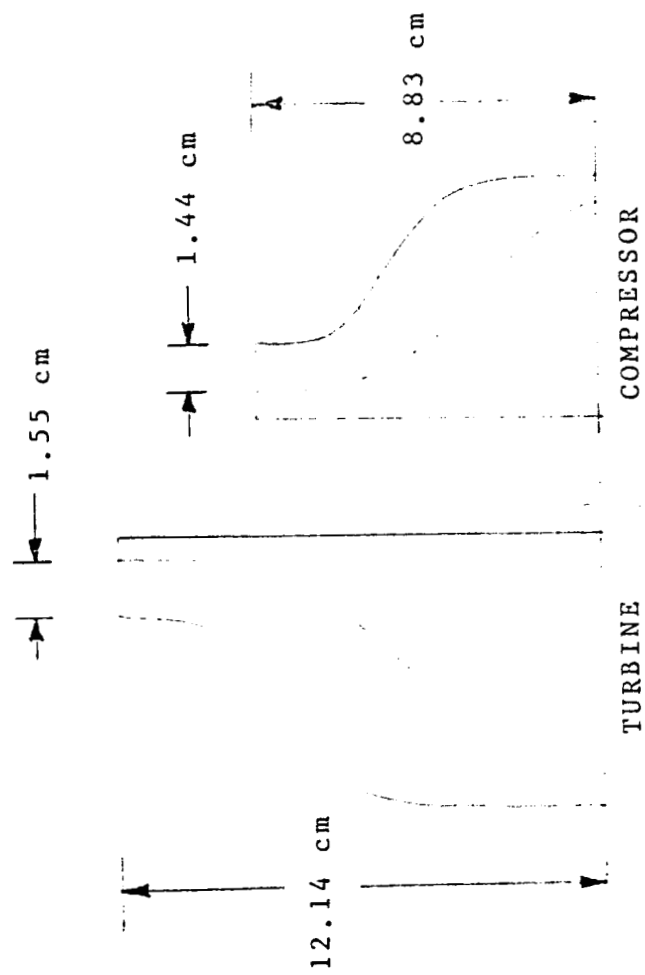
DIMENSIONS OF TURBINE AND COMPRESSOR IMPELLERS.
